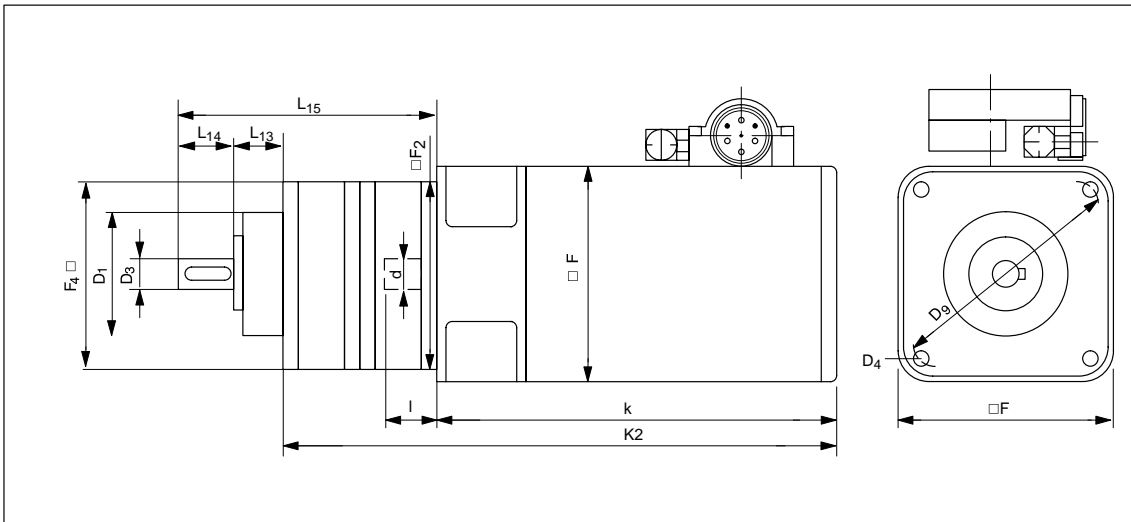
1FT5 motor with planetary gearbox (alpha company) SPG 1 stage dimensions in [mm]
